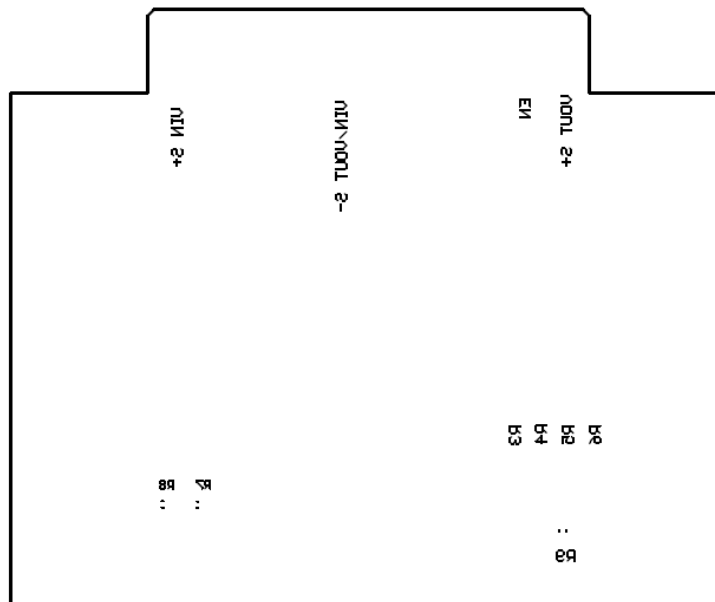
Adjustable Output Board Layout - Bottom Overlay
